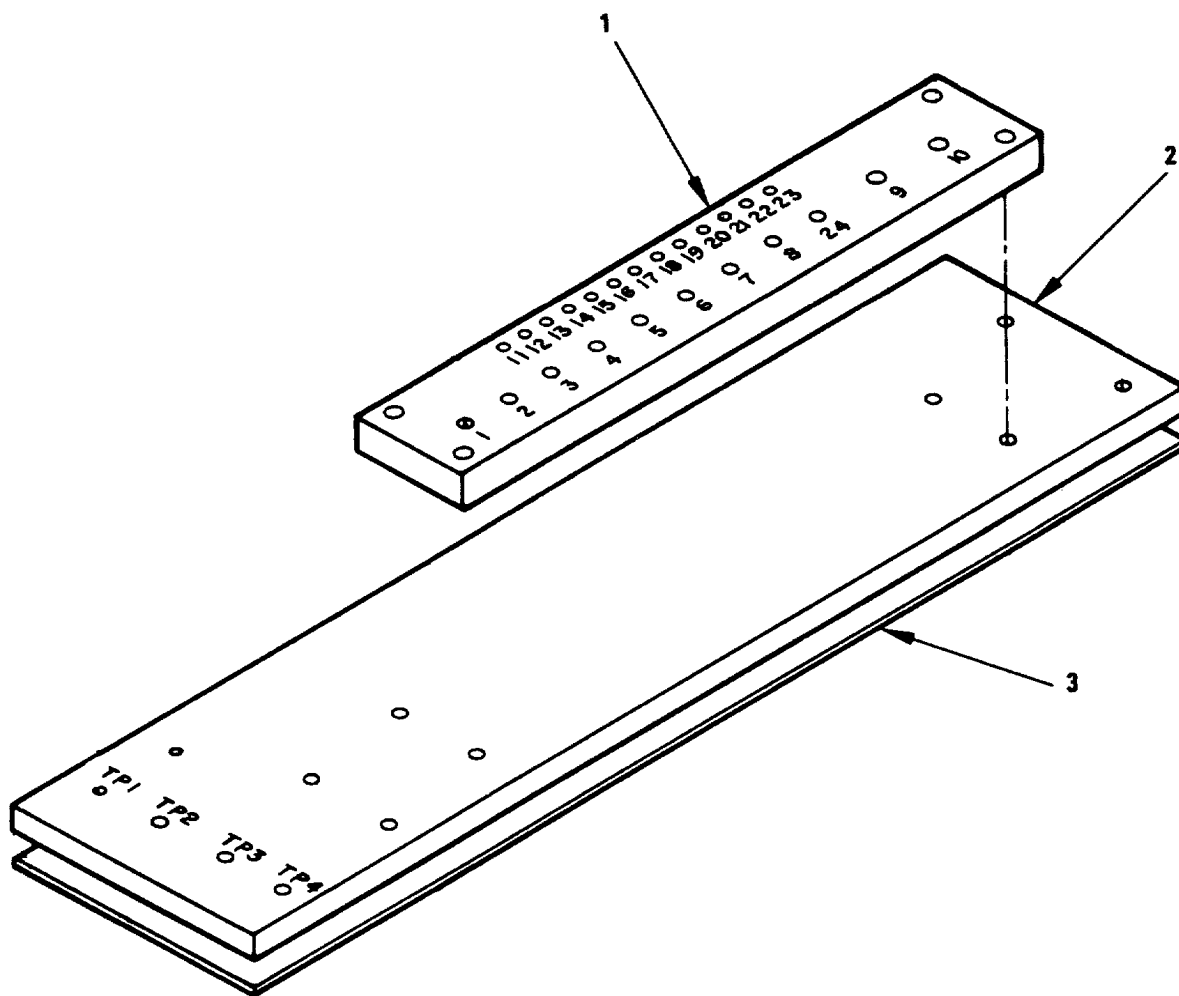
Power Control Assembly and Wiring Harness (Sheet 2 of 2).
